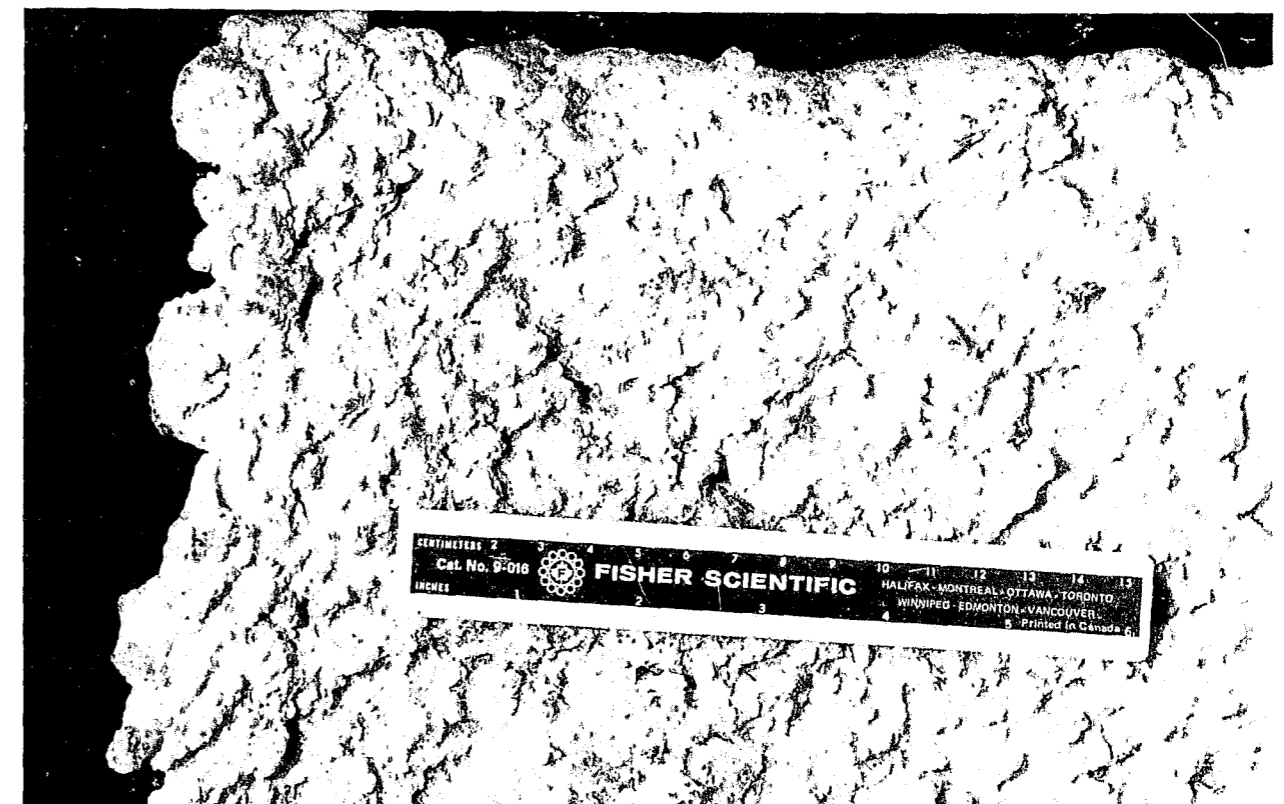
First pass of remilled crepe rubber through mill.
